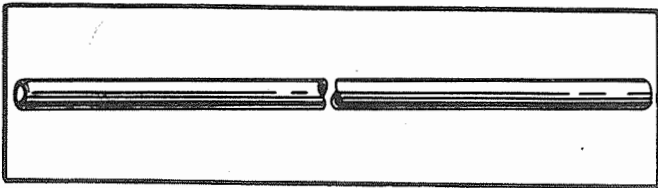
Propeller Control Oil Supply Tube and Support Assembly Aligning Tool
